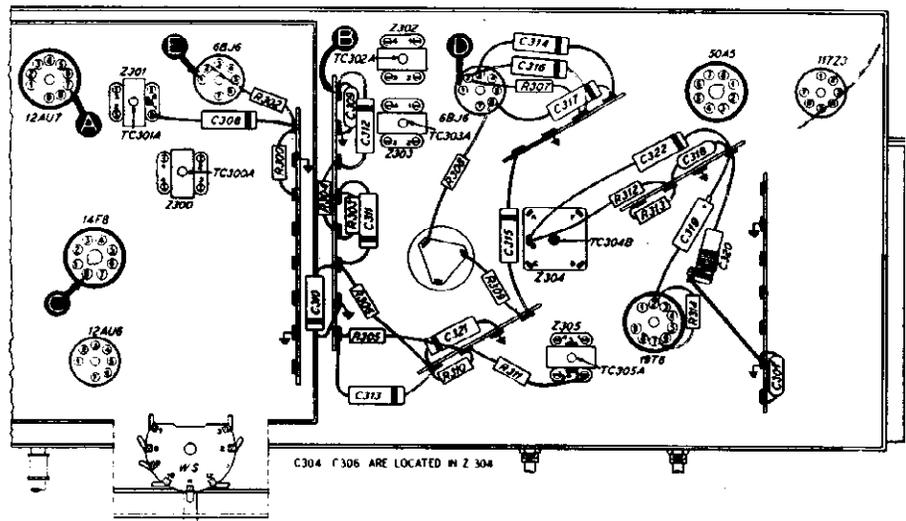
Bottom View, Showing Section 3 Test Points TP-5398C
